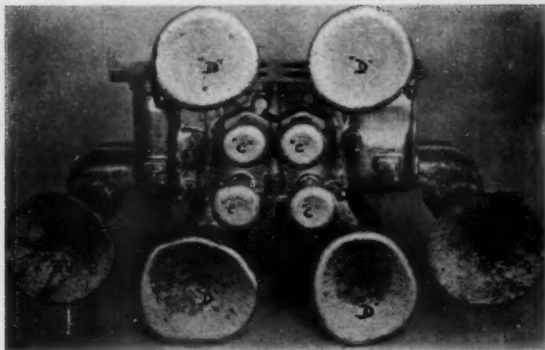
PRESENT METHOD OF GATING. POURING THROUGH GATES G AND G, WHICH ALSO ACT AS RISERS. VENTS AT C. FOUR RISERS (D) ADDED TO FEED CASTING AND PREVENT POROSITY AND TO PERMIT SCUM IN METAL TO GET OUT OF CASTING.
